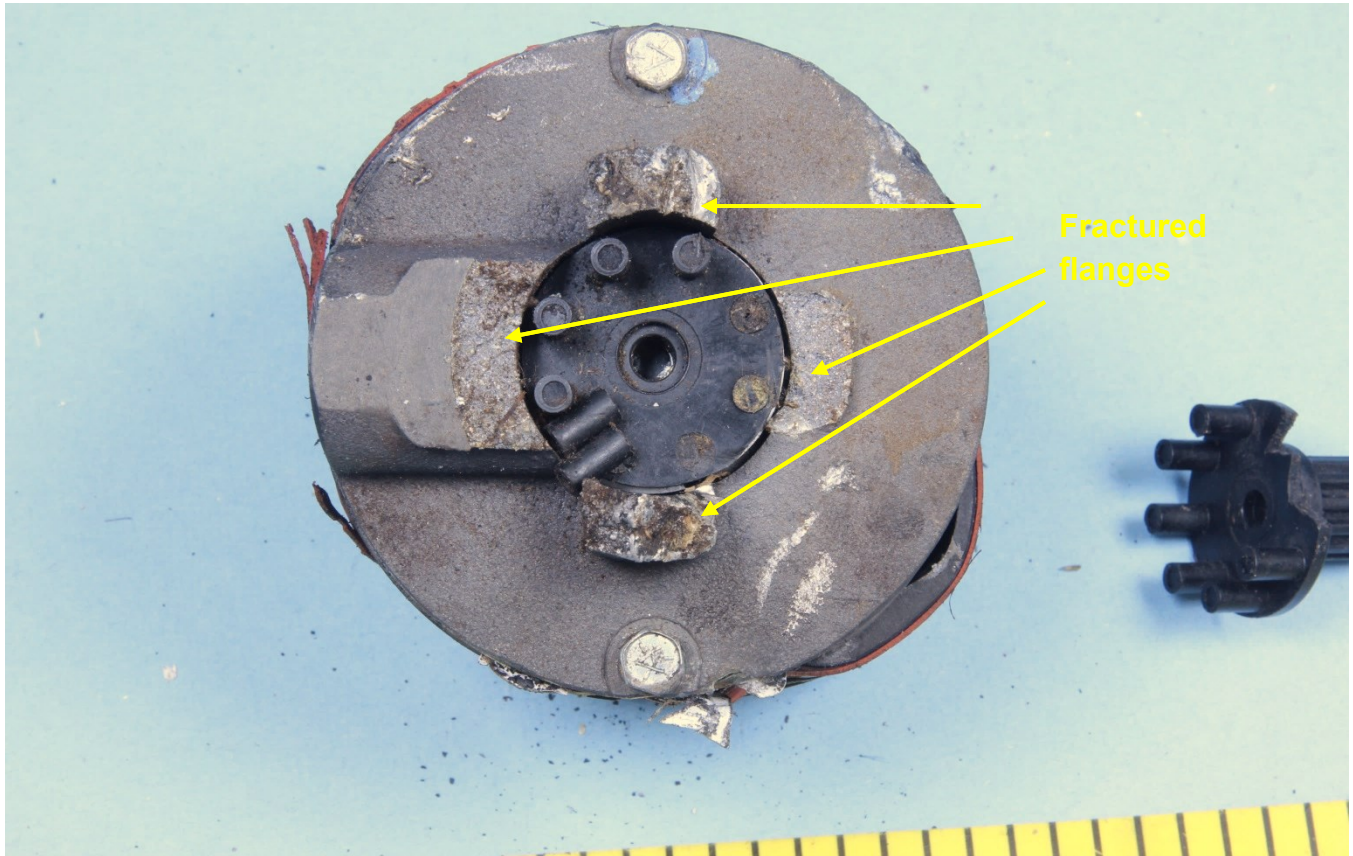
The pump housing, view from the drive or inlet side, showing fractured flanges.
